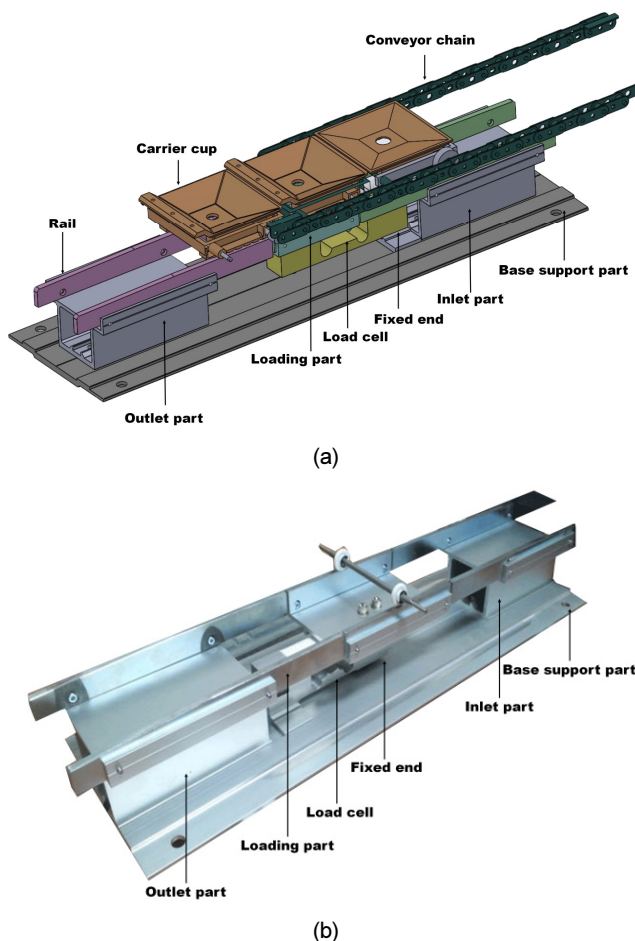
Schematic (a) and photograph (b) of weight-measuring part equipped with a single-point load cell.
